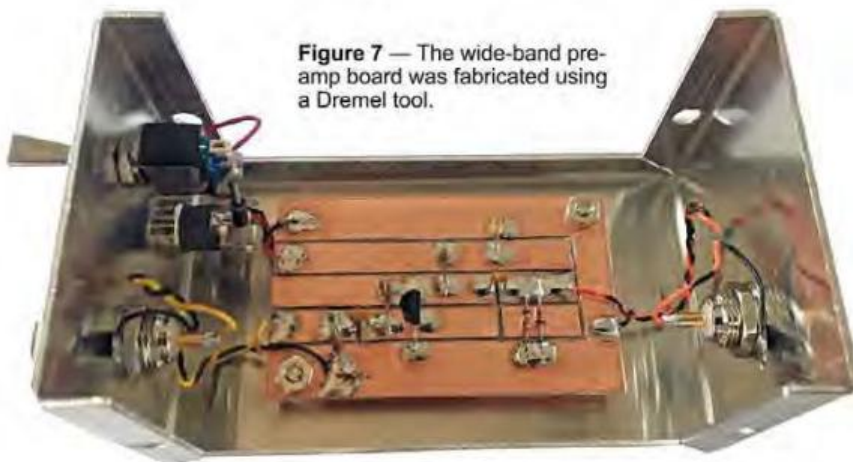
The wide-band preamp board was fabricated using a Dremel tool.
